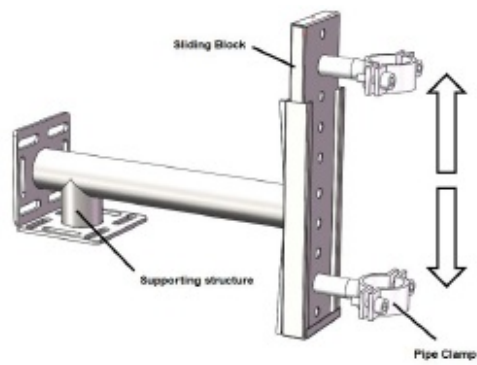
MA-120-B Submersion Adapter Mounting Bracket
